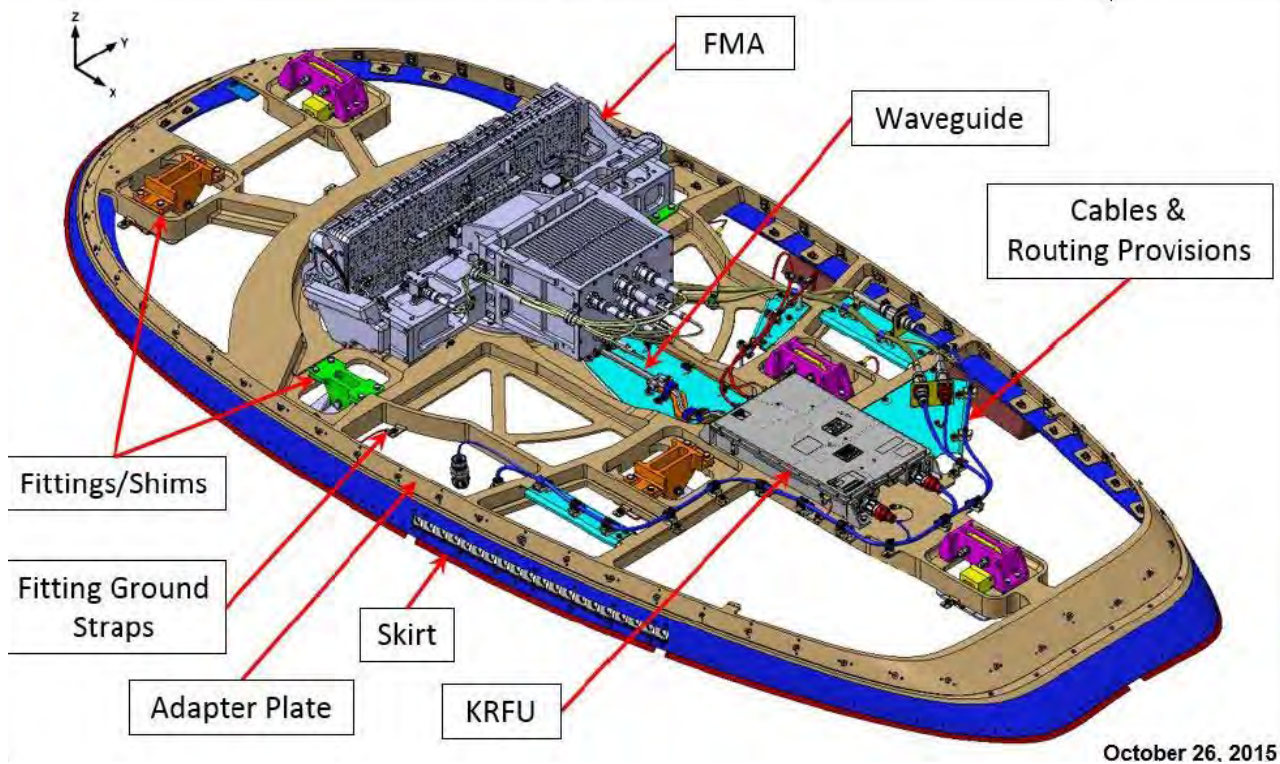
A791 Based AIM Assembly with FMA and KRFU Placement on Aircraft
